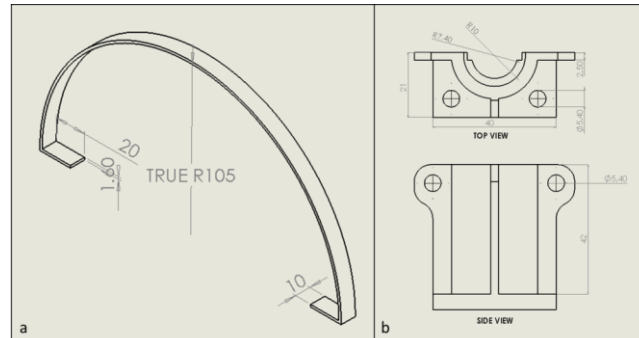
3D model of the cable support. (a) Isometric view of the cable support for the preamp output. (b) Cable support for the MRI connector. Dimensions given in mm.
